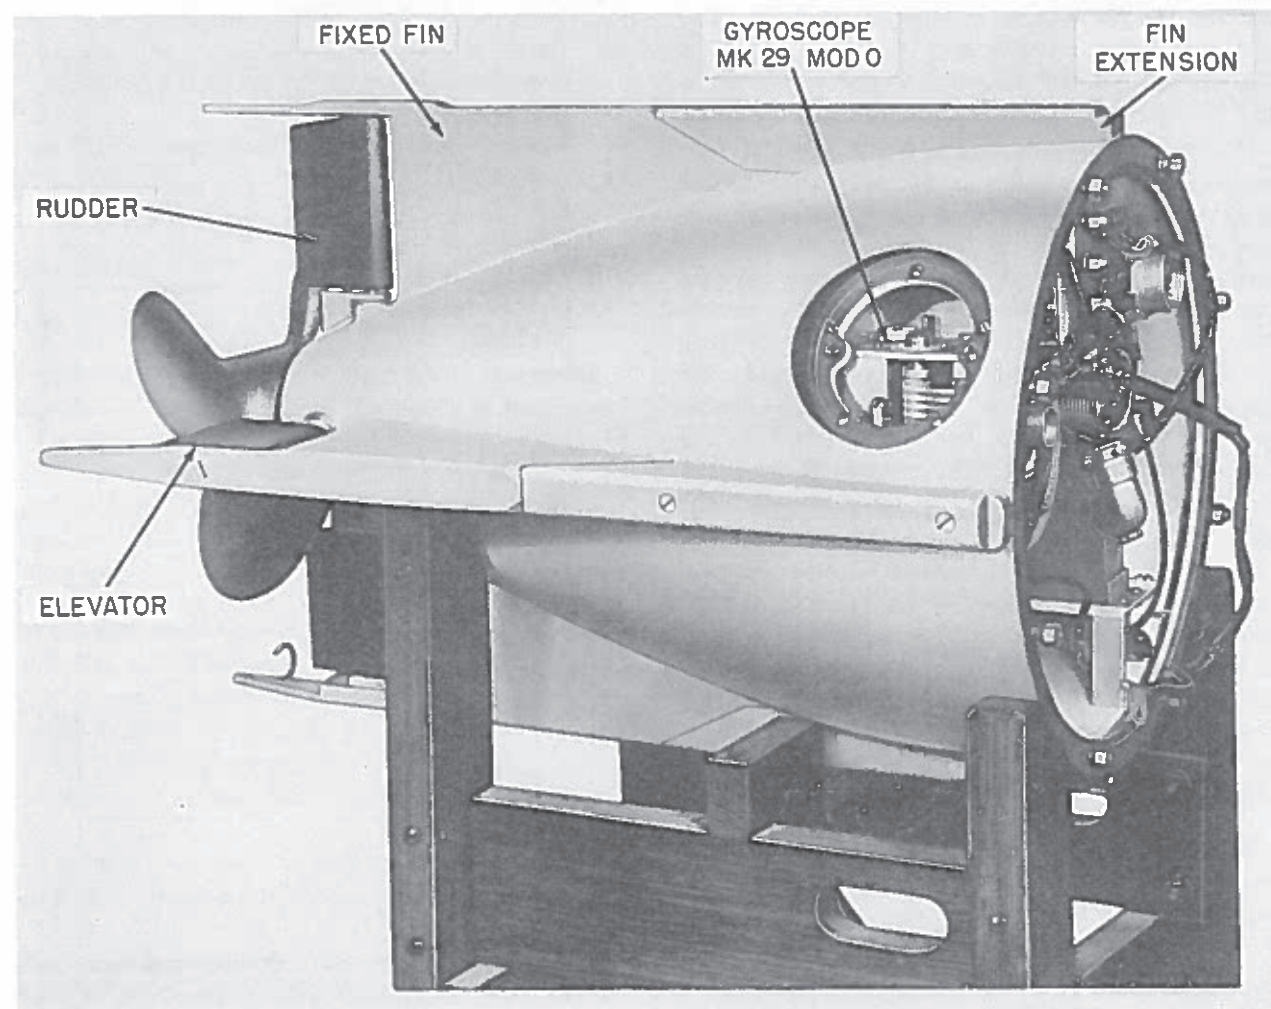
Afterbody, Starboard View (Gyro Cover Removed).
